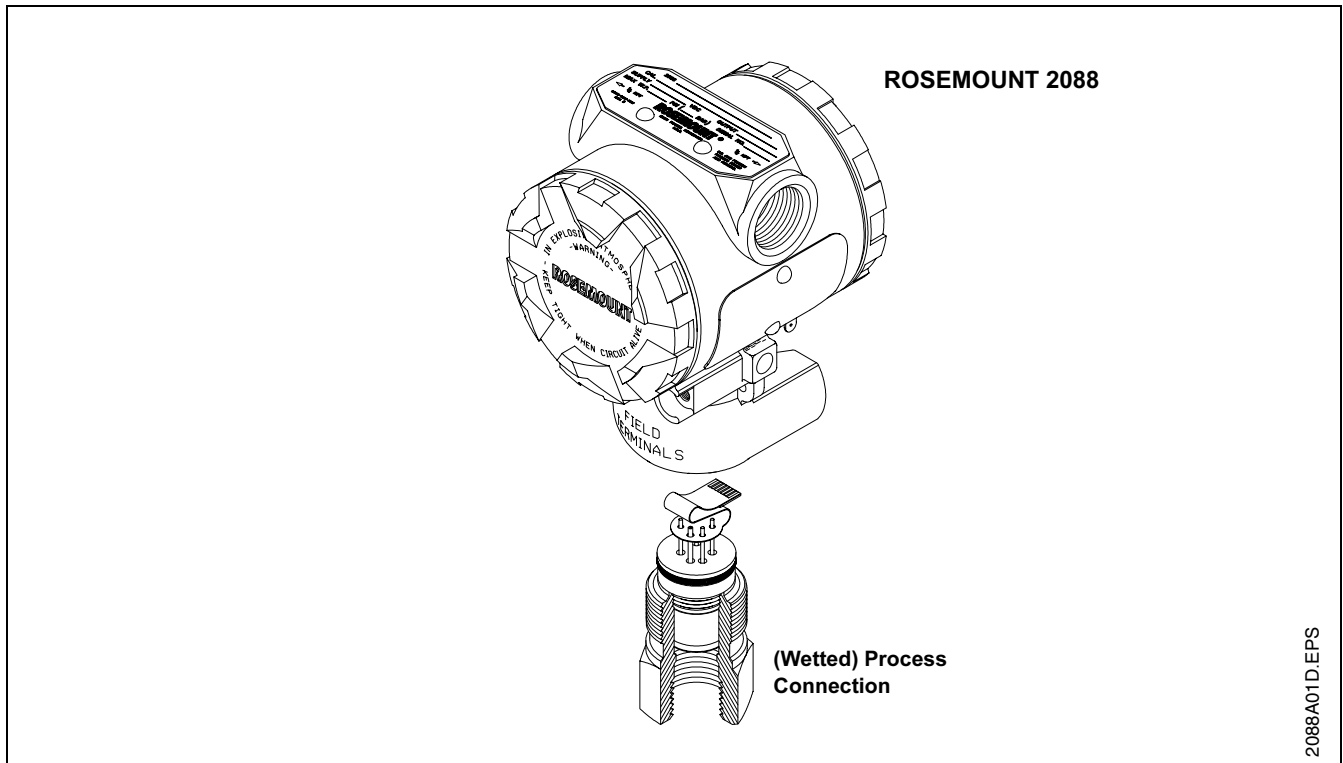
Rosemount 2088 Pressure Transmitter Exploded View Showing Wetted Parts.
